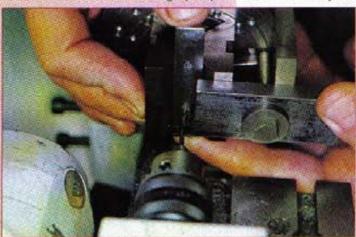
and clamp the work to it vertically. The angle plate is 3in. x 3in. made from cast iron, the thickness being 1/2in. All it needs is a few holes drilled for bolts. Once set true it makes a very good support, as well as being used for marking out. There is a quick way of setting true by
